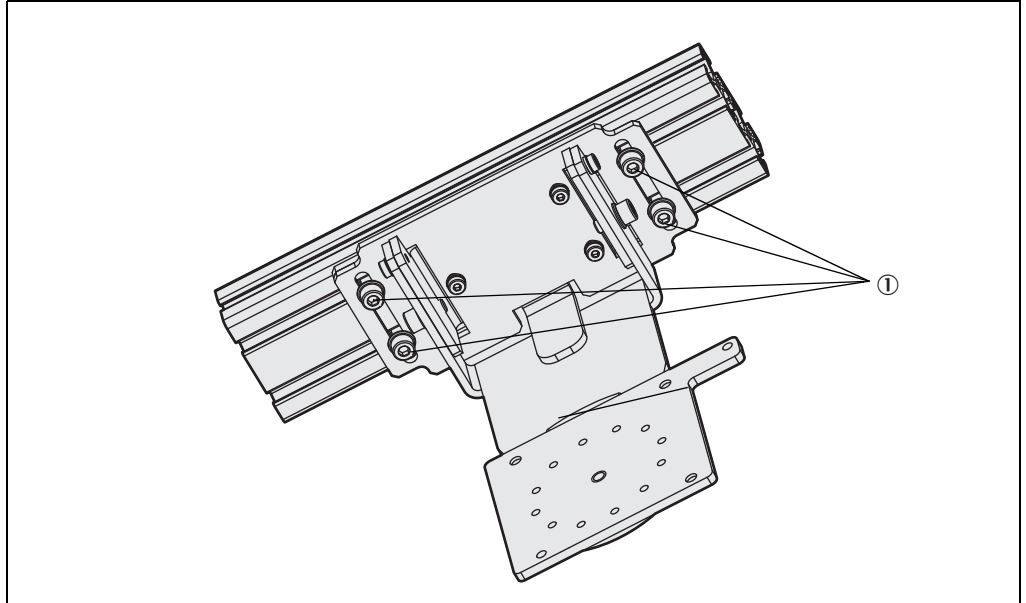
Screws on the mounting kit for the adjustment of the angle α
